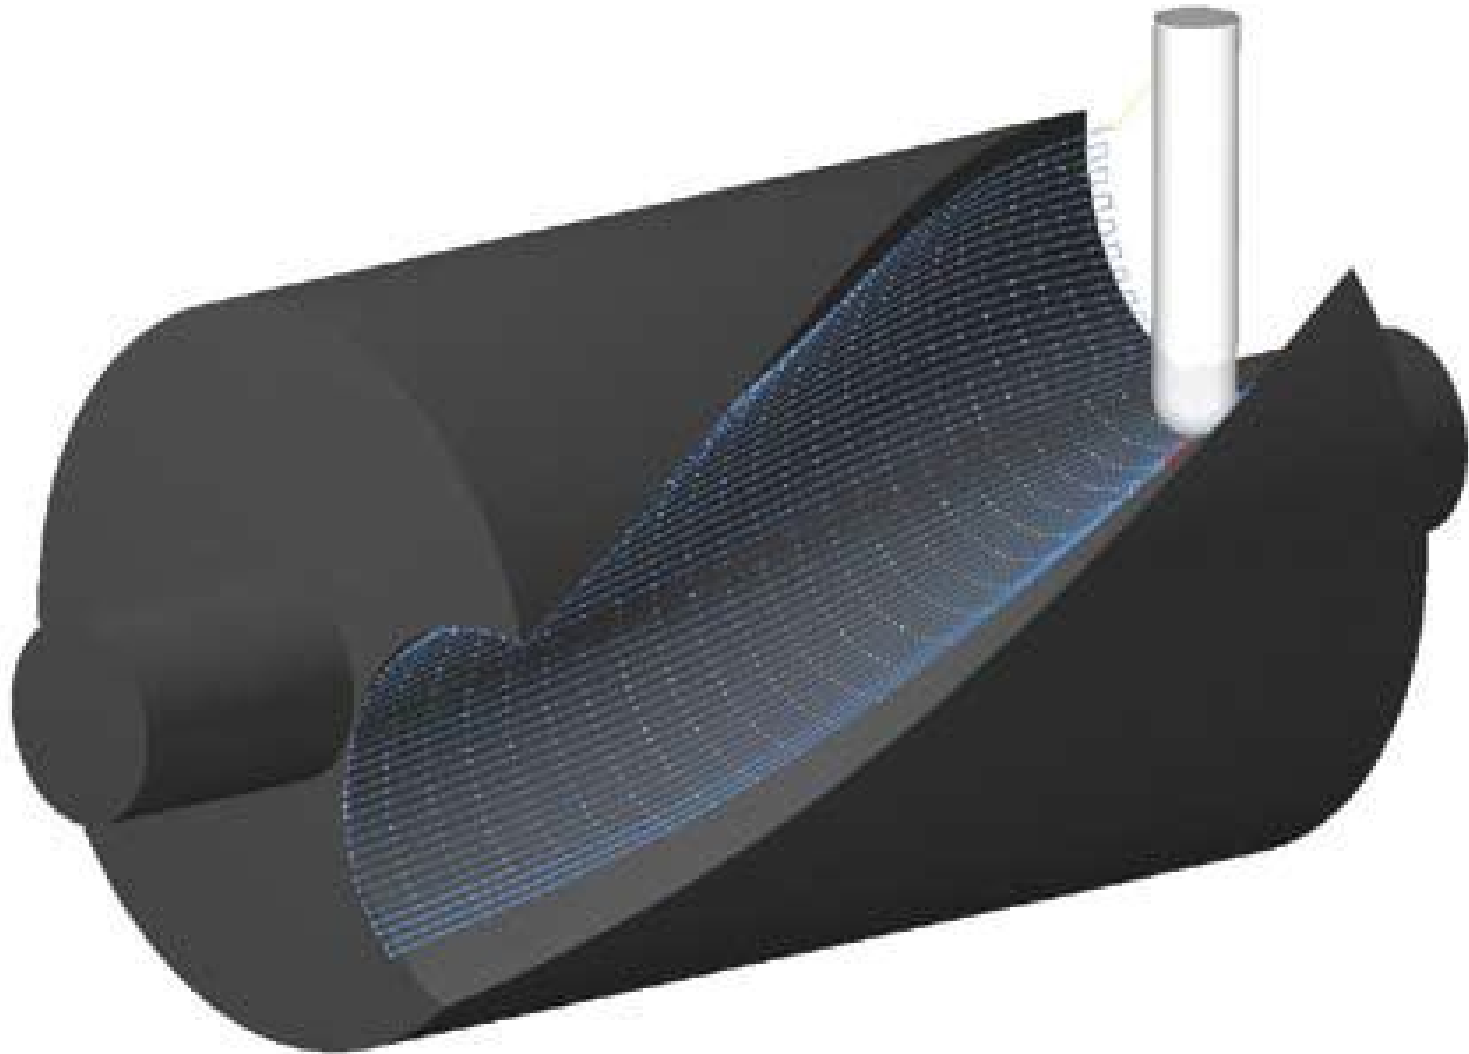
Sketch of simultaneous cutting on a 4-axis machine -XYZA.
